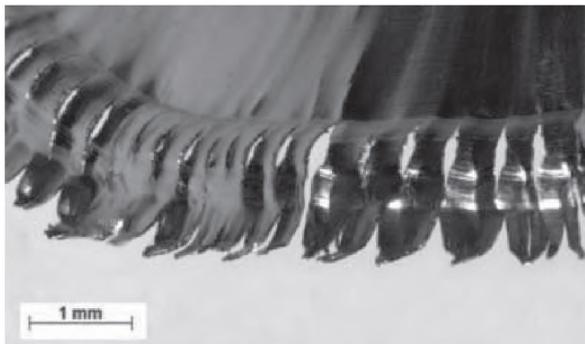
Chip after machining with carbon dioxide cooling for an external insert
